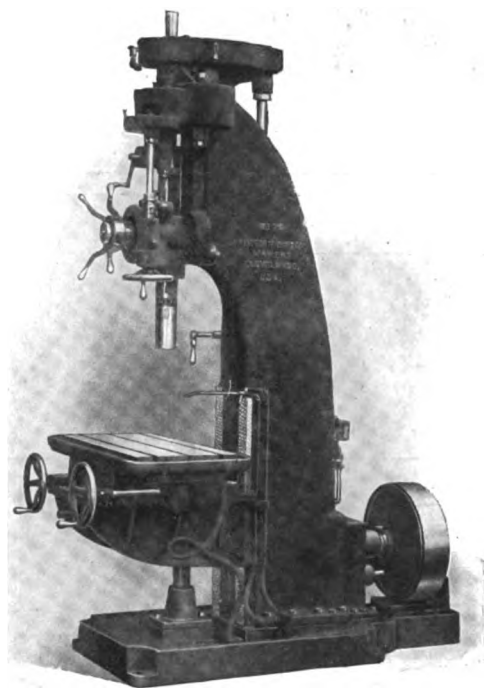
No. 25—24-In. High Duty Drill with Compound Table
